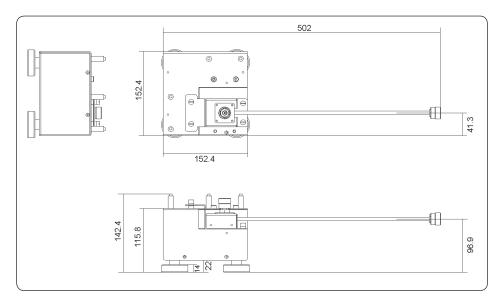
Option E4991A-007 test head dimensions (in millimeters, nominal)
